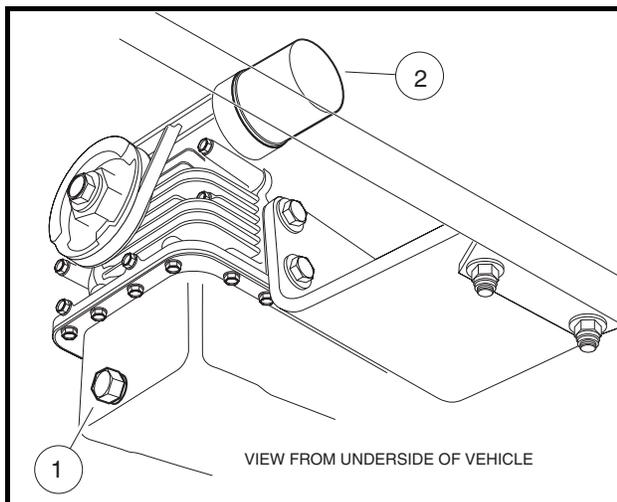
Engine Oil Drain Plug and Oil Filter – Diesel Vehicles
